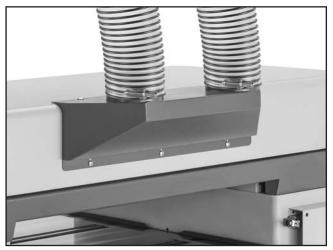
Dust hoses attached to dust ports (G0988 shown).
